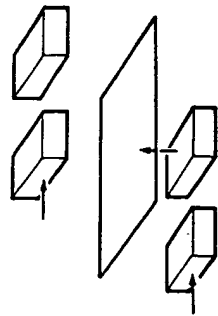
"Pushing upward" principle on overpackaging machines — first step
